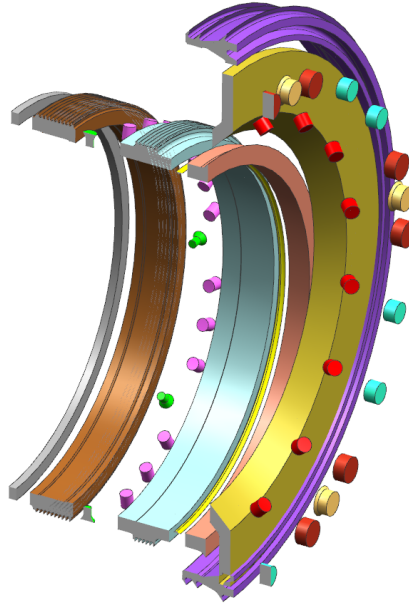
IPT Stub Shaft Design Features. Coloured names represent the stub shaft features - HP3 Air Seal Fins, Flange Holes, Taper Bolt Holes, Dowel Holes, R030 Holes, Mating Face, Seal Ring Mating Face, Air/Air Lab Seal, Rivet Holes, R044 Holes, Oil/Air Lab Seal, Weld Joint.
